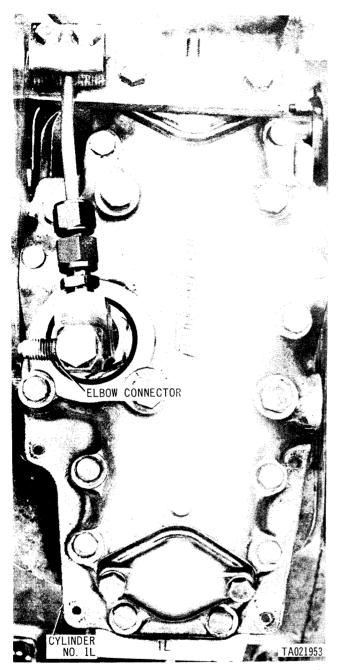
Removing or installing fuel injector nozzle, fuel tube connector and special bolt, cylinder No. 1L.
